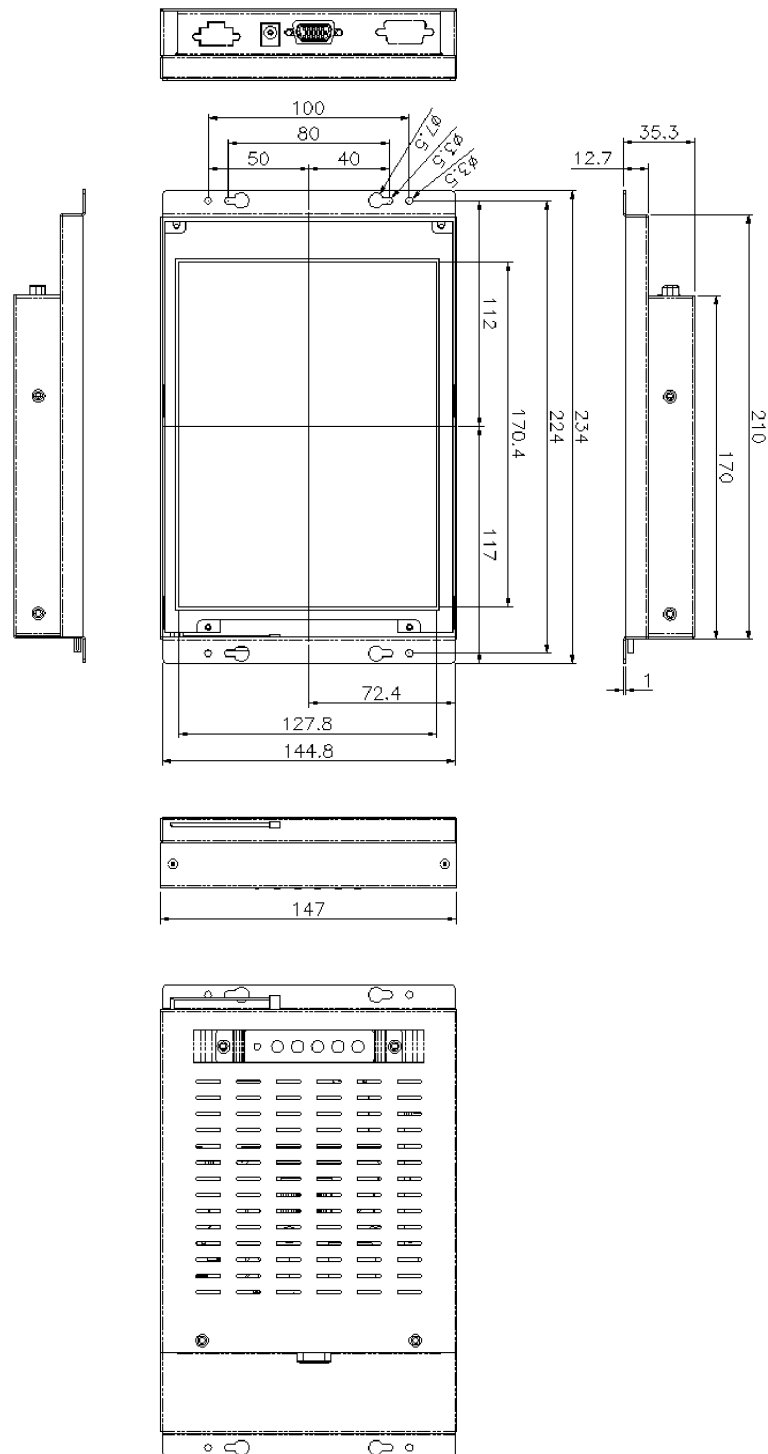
2007600 Physical Dimensions (millimeters)
